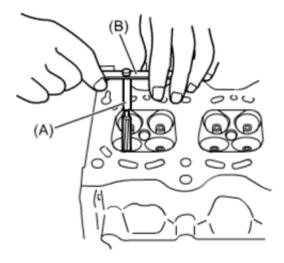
Reaming Valve Guide Bore With Special Tool Courtesy of SUZUKI OF AMERICA CORP.
